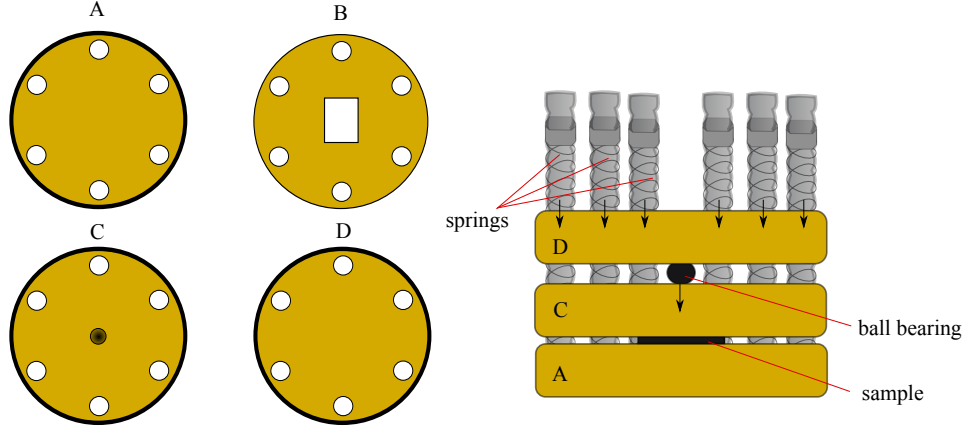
Left: The jig parts (top view). Part B is used to align the samples and it is only $900\mu\text{m}$ thick. Parts C and D are identical in shape and size. The dark spot in the centre of part C is the recess in which a steel bearing is placed. M6 screws are placed in circular holes near the sides of the parts. Right: the jig as seen from the side. Black arrows indicate the force exerted on the jig parts.
